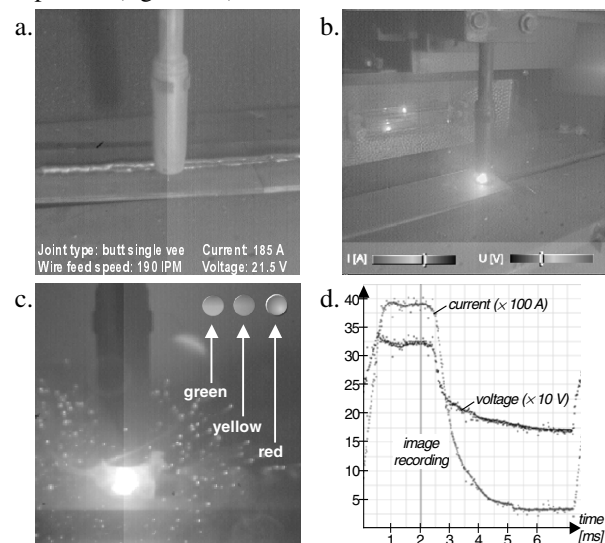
a. Welding preparation; b. welding process; c. online-monitoring; d. weld inspection
